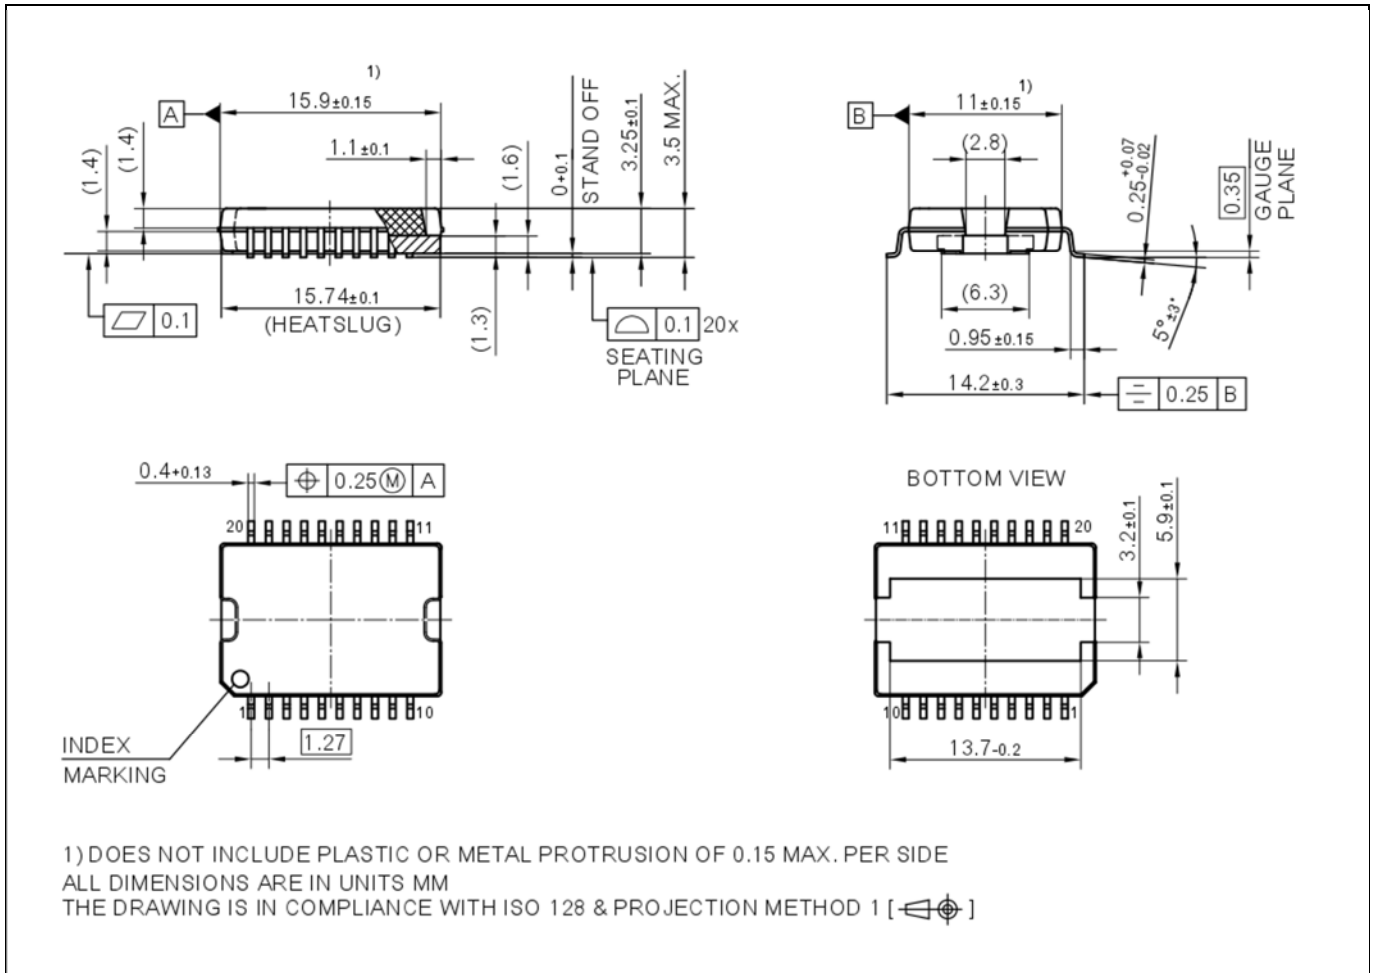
PG-DSO-20-85 Package Outline, dimensions (mm)
